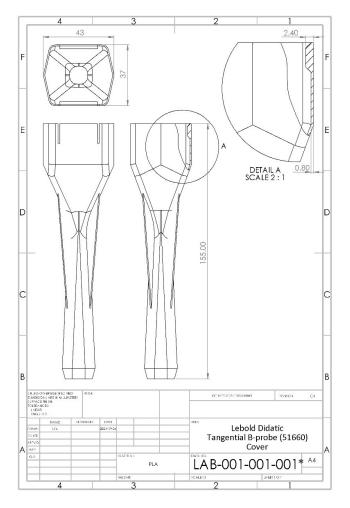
2D TECHNICAL DRAWING OF THE COVER.
